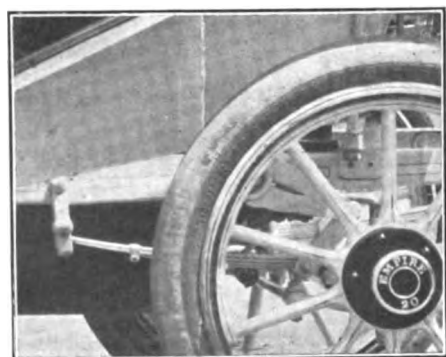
Part of front suspension, showing details of half-elliptic spring shackle.
